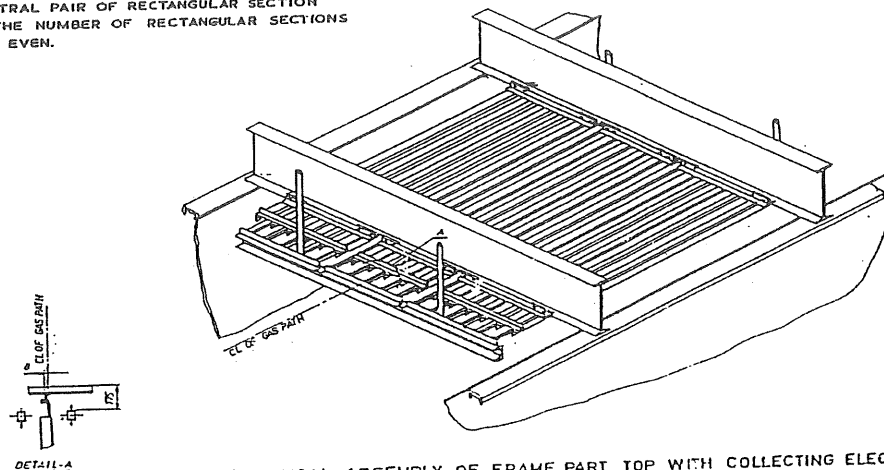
TYPICAL ASSEMBLY OF FRAME PART TOP WITH COLLECTING ELECTRODE SUSPENSION SHOWING THE GASPETH CENTRELINE.
